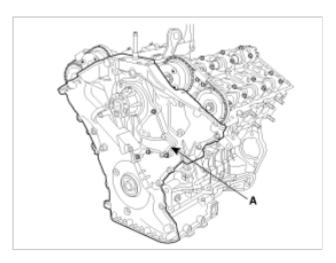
Identifying Cylinder Head Cover Courtesy of HYUNDAI MOTOR CO.
